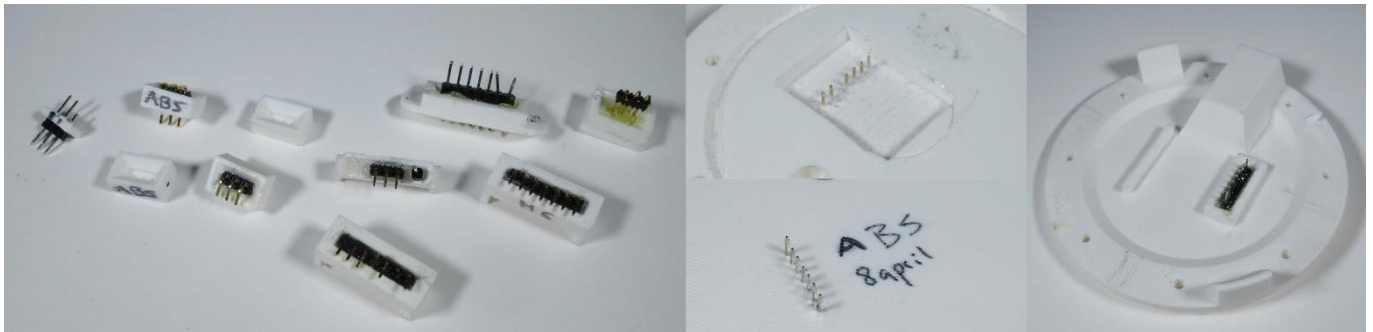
Small 3Dprints made to iterate joining the connector pins in a trench; early version of base plate with space for PCB, later version that had a flat top; example of a base plate with connector pins attached
